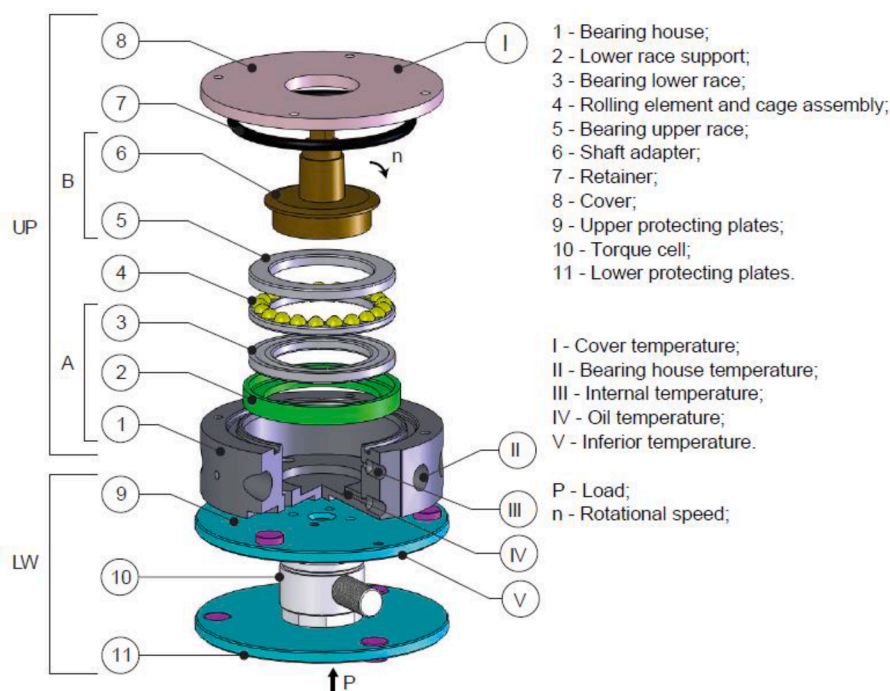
Schematic diagram of rolling bearing assembly [103].
